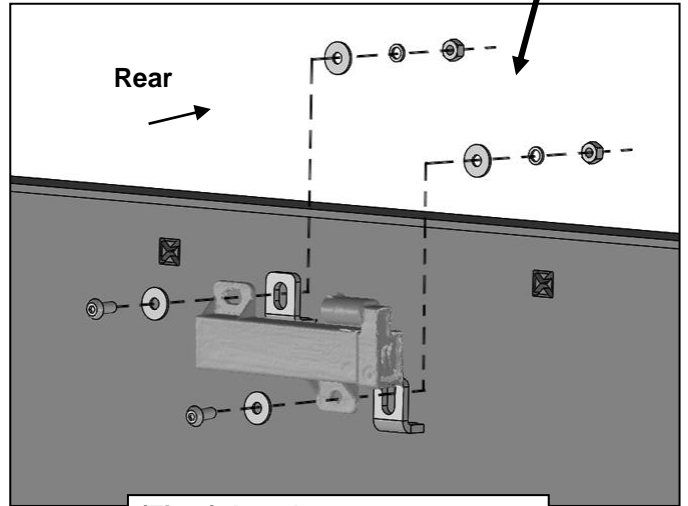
Remove Rear Remote Key Antenna from behind bumper
